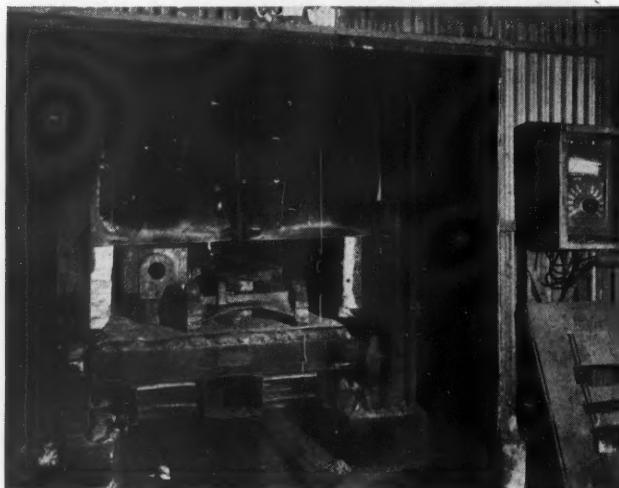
'Home-built' car-bottom furnace for normalizing forgings, annealing welded parts, and similar work. Of comparatively simple construction, the furnace is considered indispensable.
